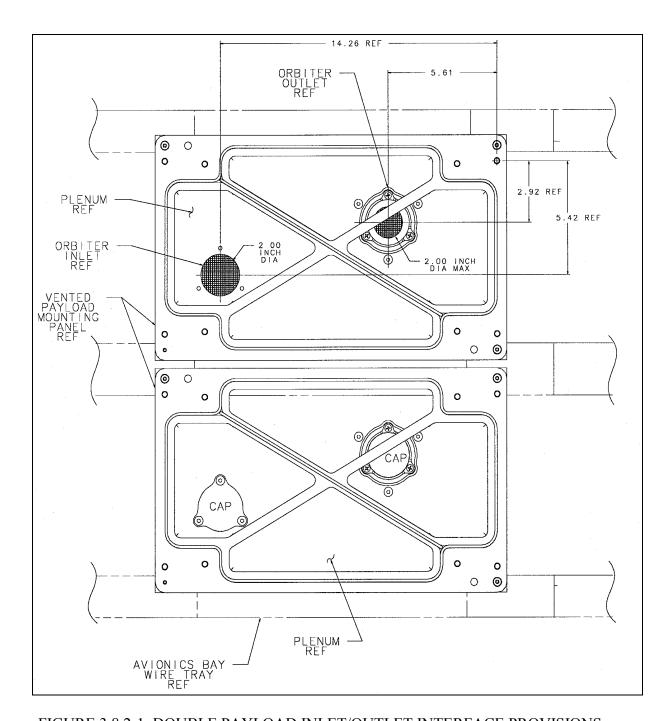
DOUBLE PAYLOAD INLET/OUTLET INTERFACE PROVISIONS TOP HALF OF PAYLOAD INLET AND OUTLETS (SHEET 1 OF 3)
